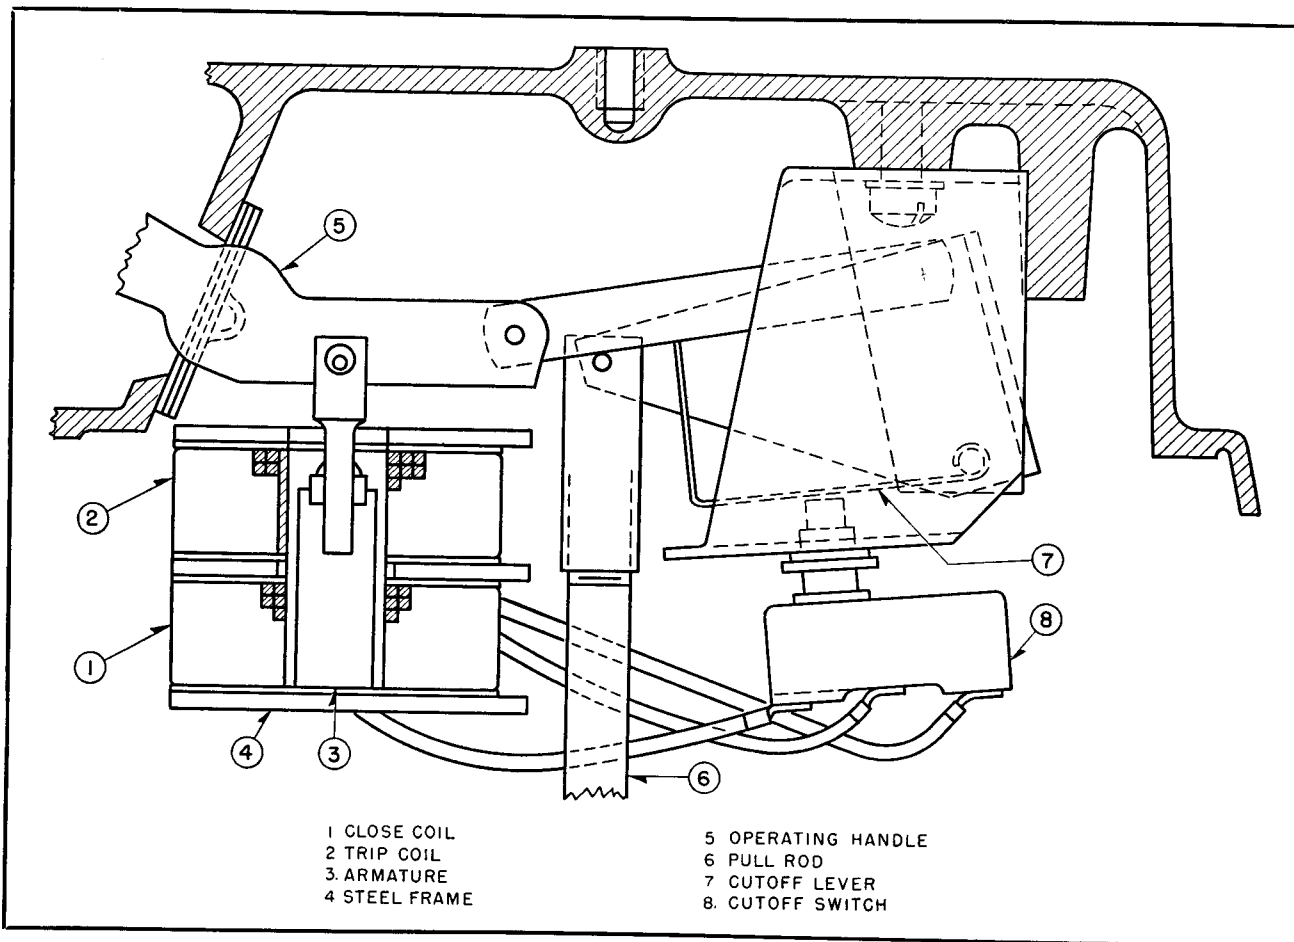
Operating Mechanism for Type CSO Oil Switch
